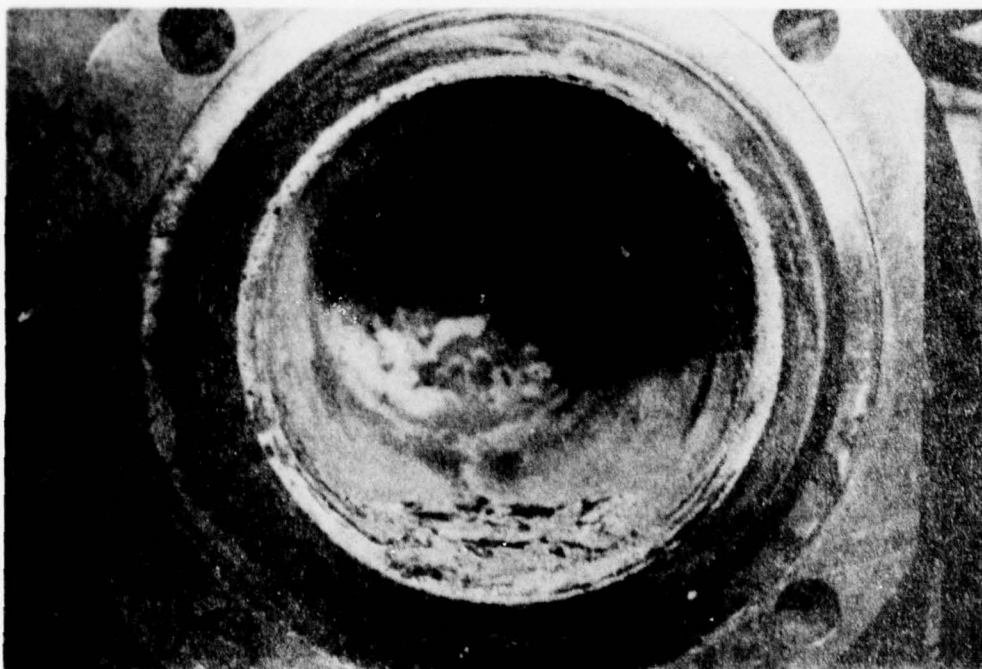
Combustion Chamber and Injector Plate - Note Magnesium Oxide Deposits on Walls and Injector Plate Face - Deposit Flakes at Bottom Were Broken Loose During Disassembly
